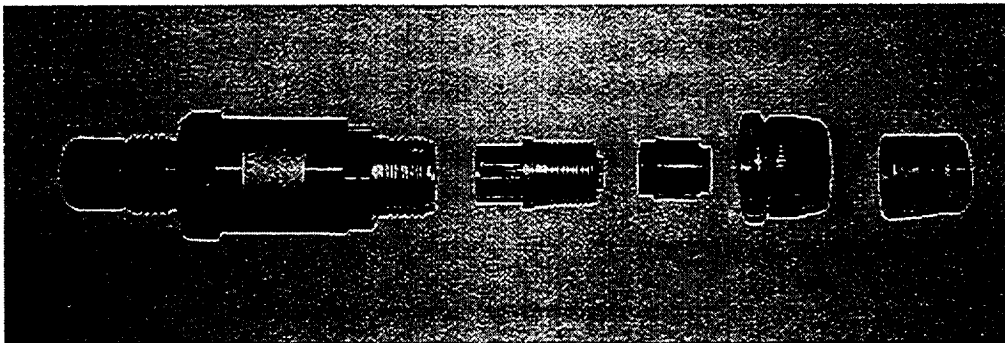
Photograph of Halex 2900-1 thruster (linear actuator) used for separating payload from expended rocket motor, and to break shear pins on aft end of parachute canister extraction plates to deploy drogue chute.
